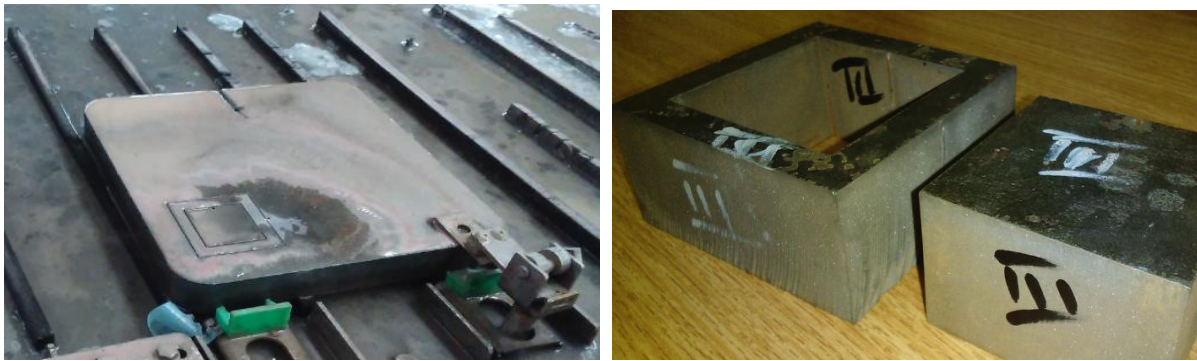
a) Part after cutting still on the machine; b) Same part after taking out of the base plate
